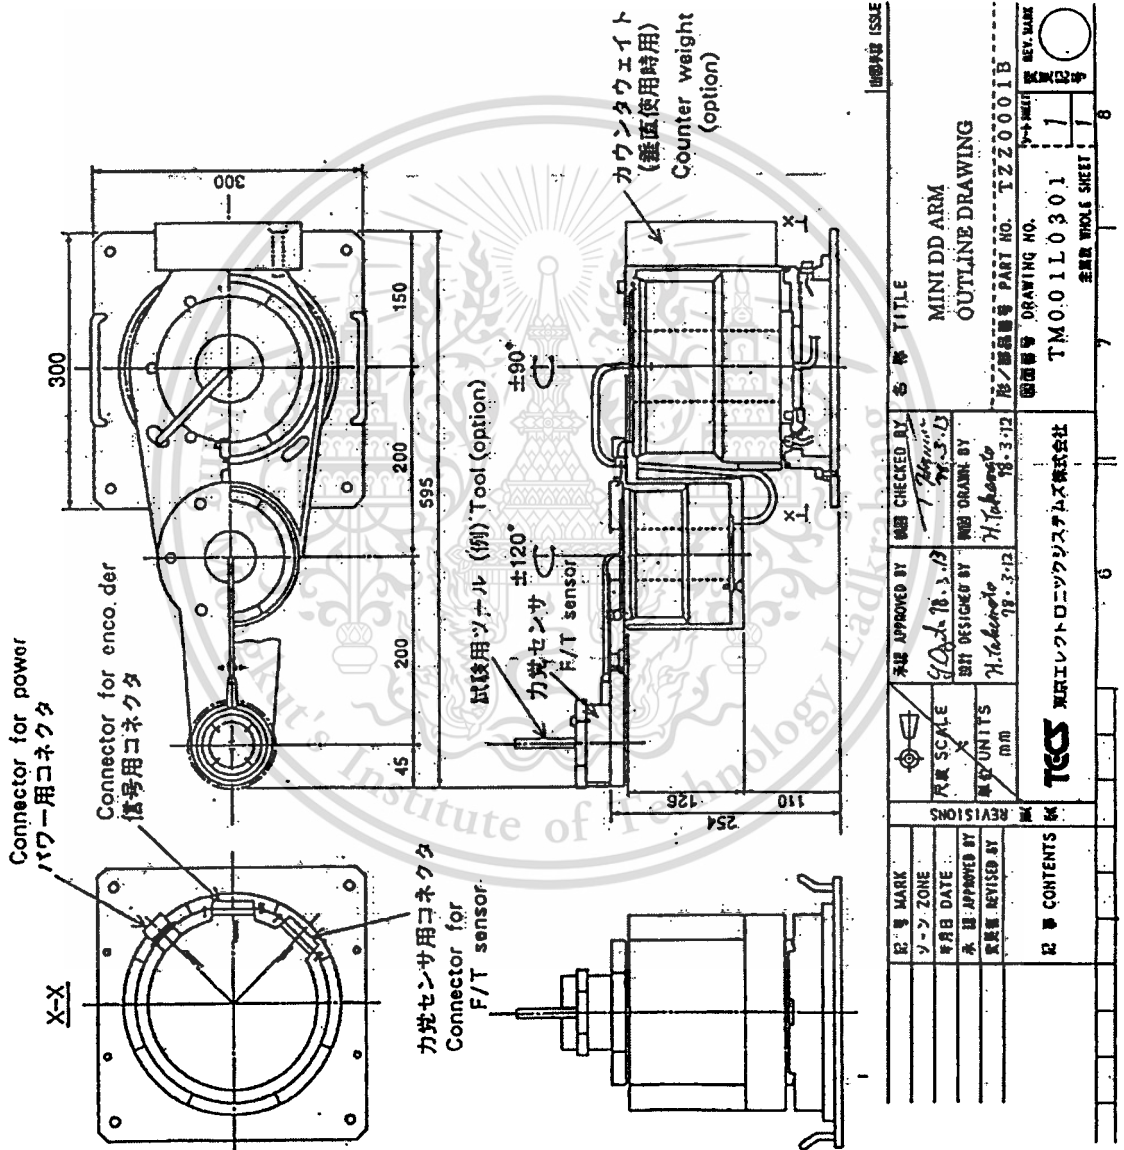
Outline Drawing of Two-Link Robot Manipulator.
